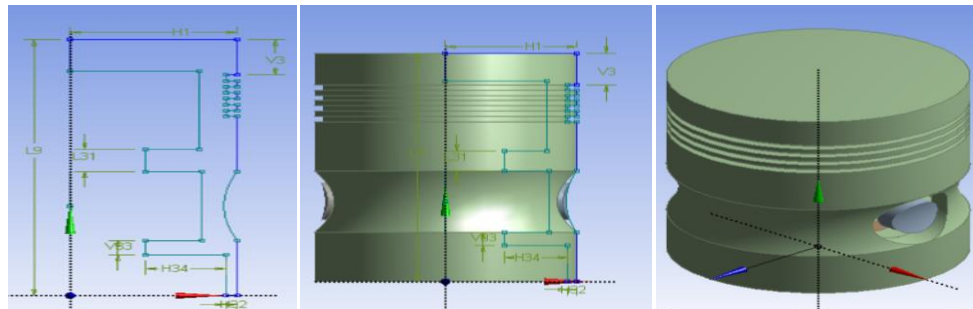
Sketch of piston sketch (Front view) Uncoated piston (Isometric view)
